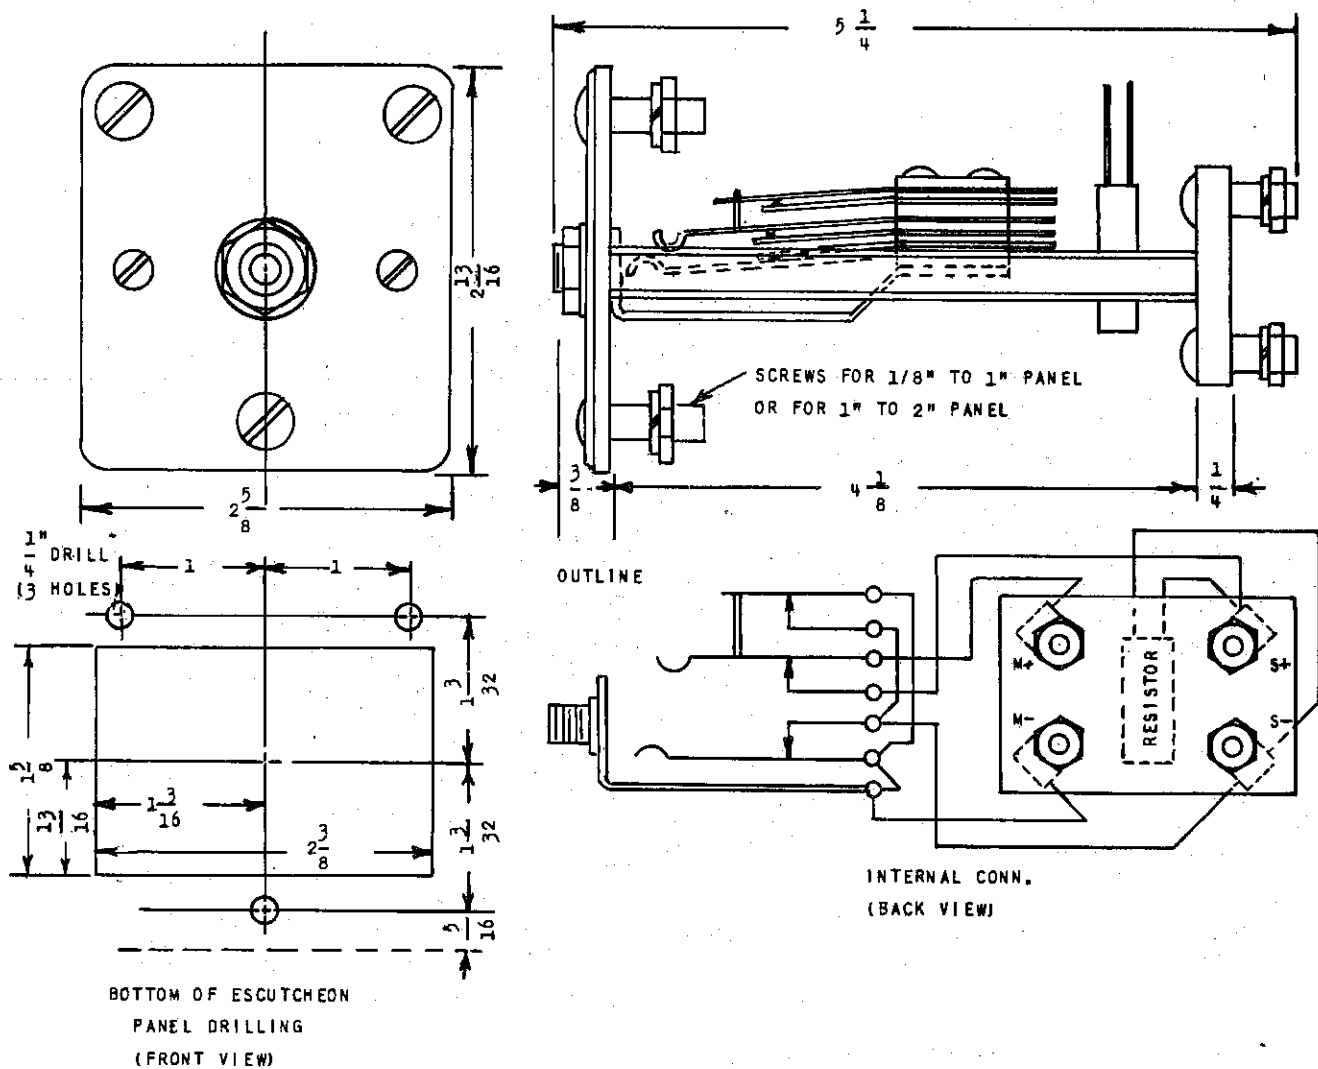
Outline, Panel Drilling, And Internal Connections For Meter Jack
